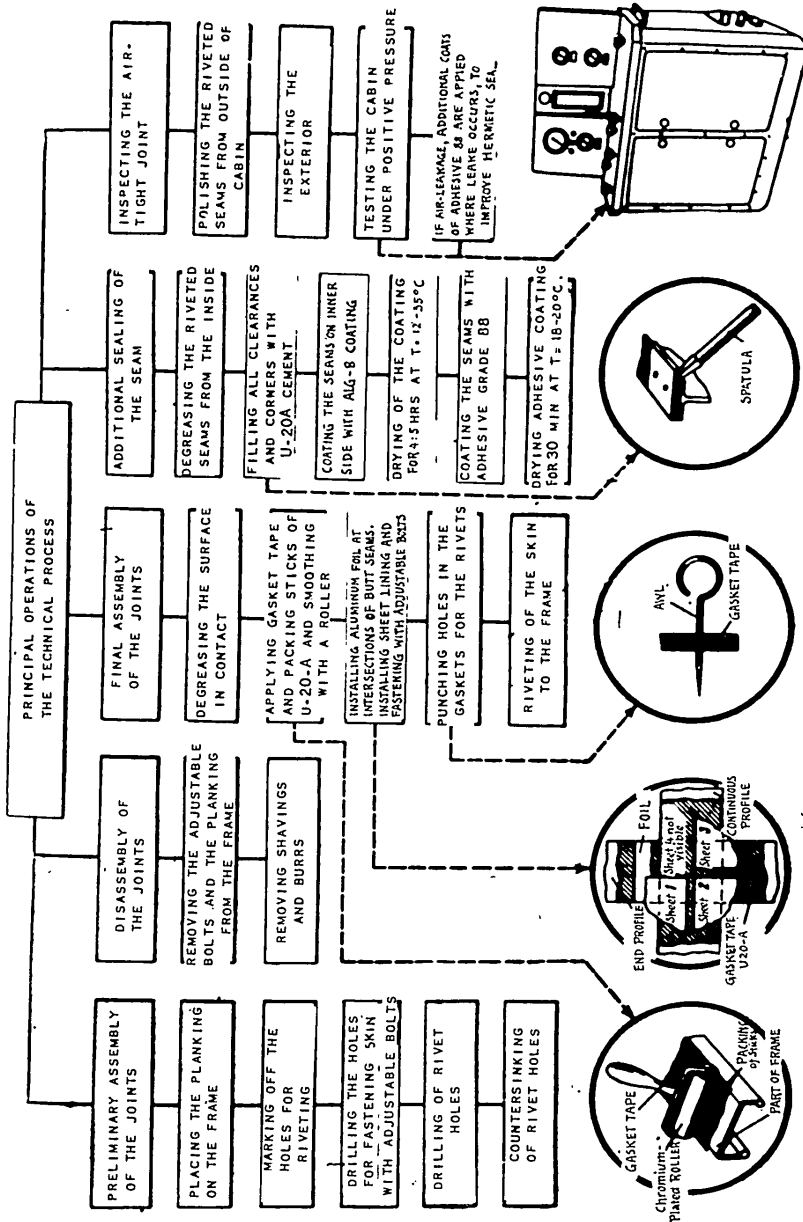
Typical Technical Process of Assembly and Riveting of Airtight Cabins, Using a Film-type Sealing Compound
